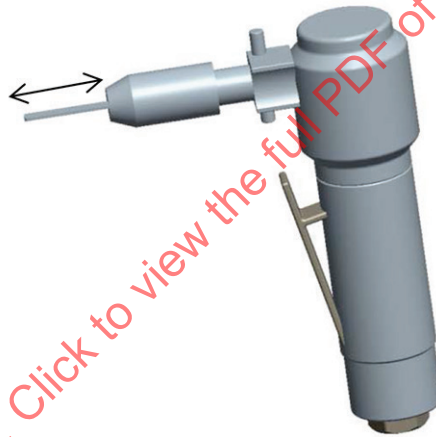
Angle reciprocating polishing/filing machine with tool holder without moving parts — Designed for two handed operation
